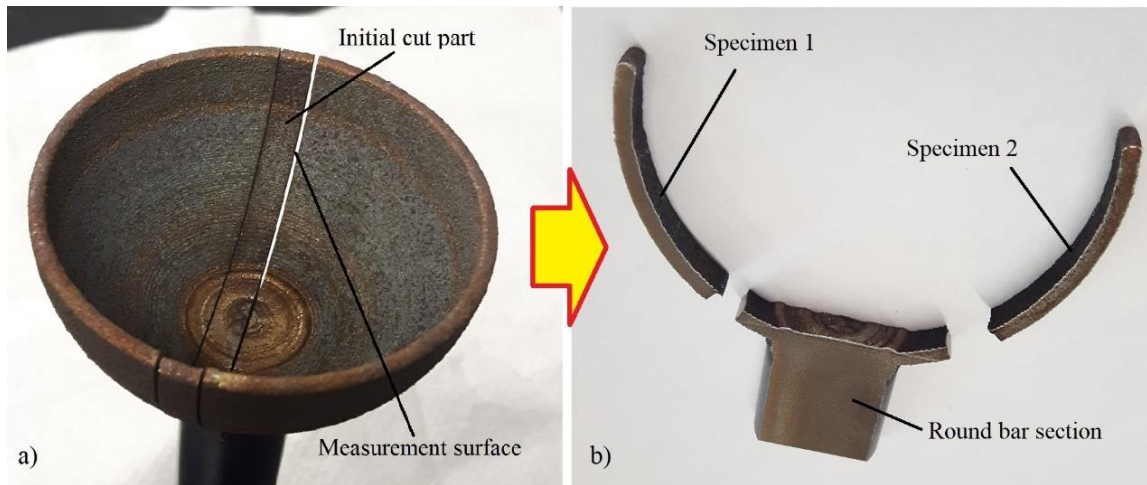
(a) Cut line (b) The specimen is cut into three smaller specimens
